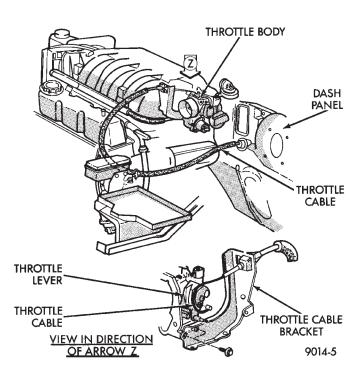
Throttle Cable Attachment to Throttle Body Attachment—3.3L Engine
